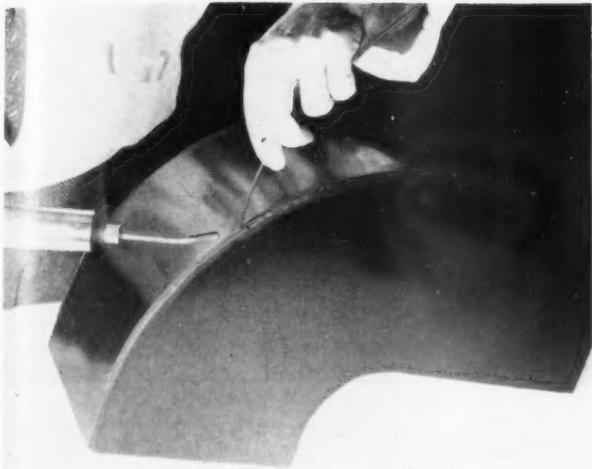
Welding a polyvinyl chloride curved duct section. Such welds are fairly easy to make, once the technique is learned.
